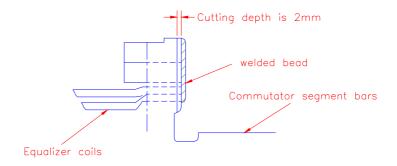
MACHINING OF COMMUTATOR RISER END FACE
